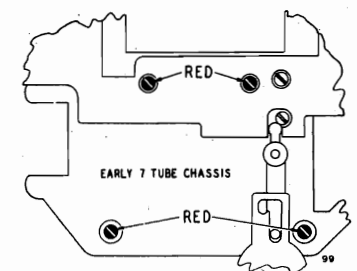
Location of 4 Red Mounting Screws in Early Models
